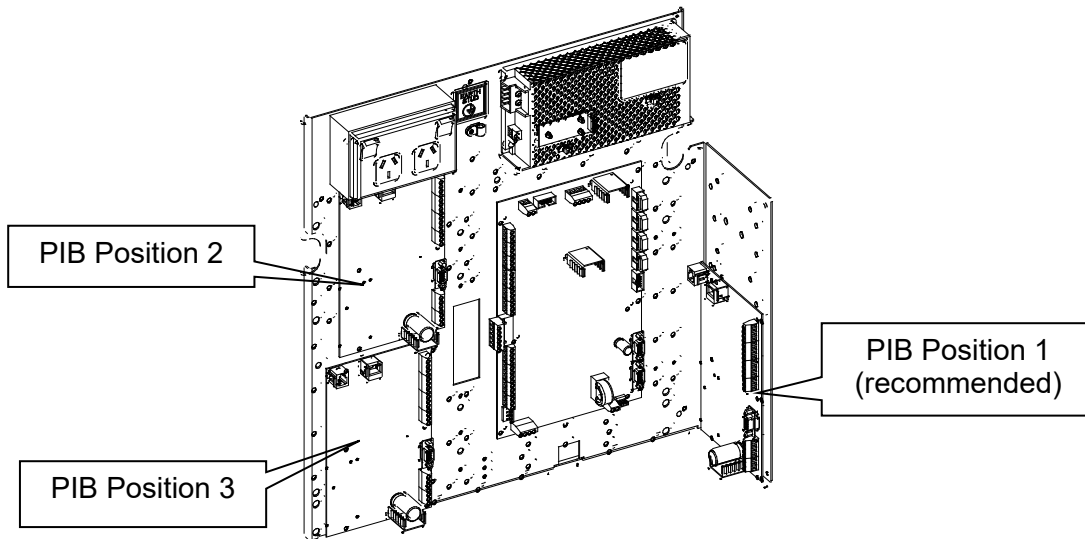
15U Cabinet PIB Mounting Positions
